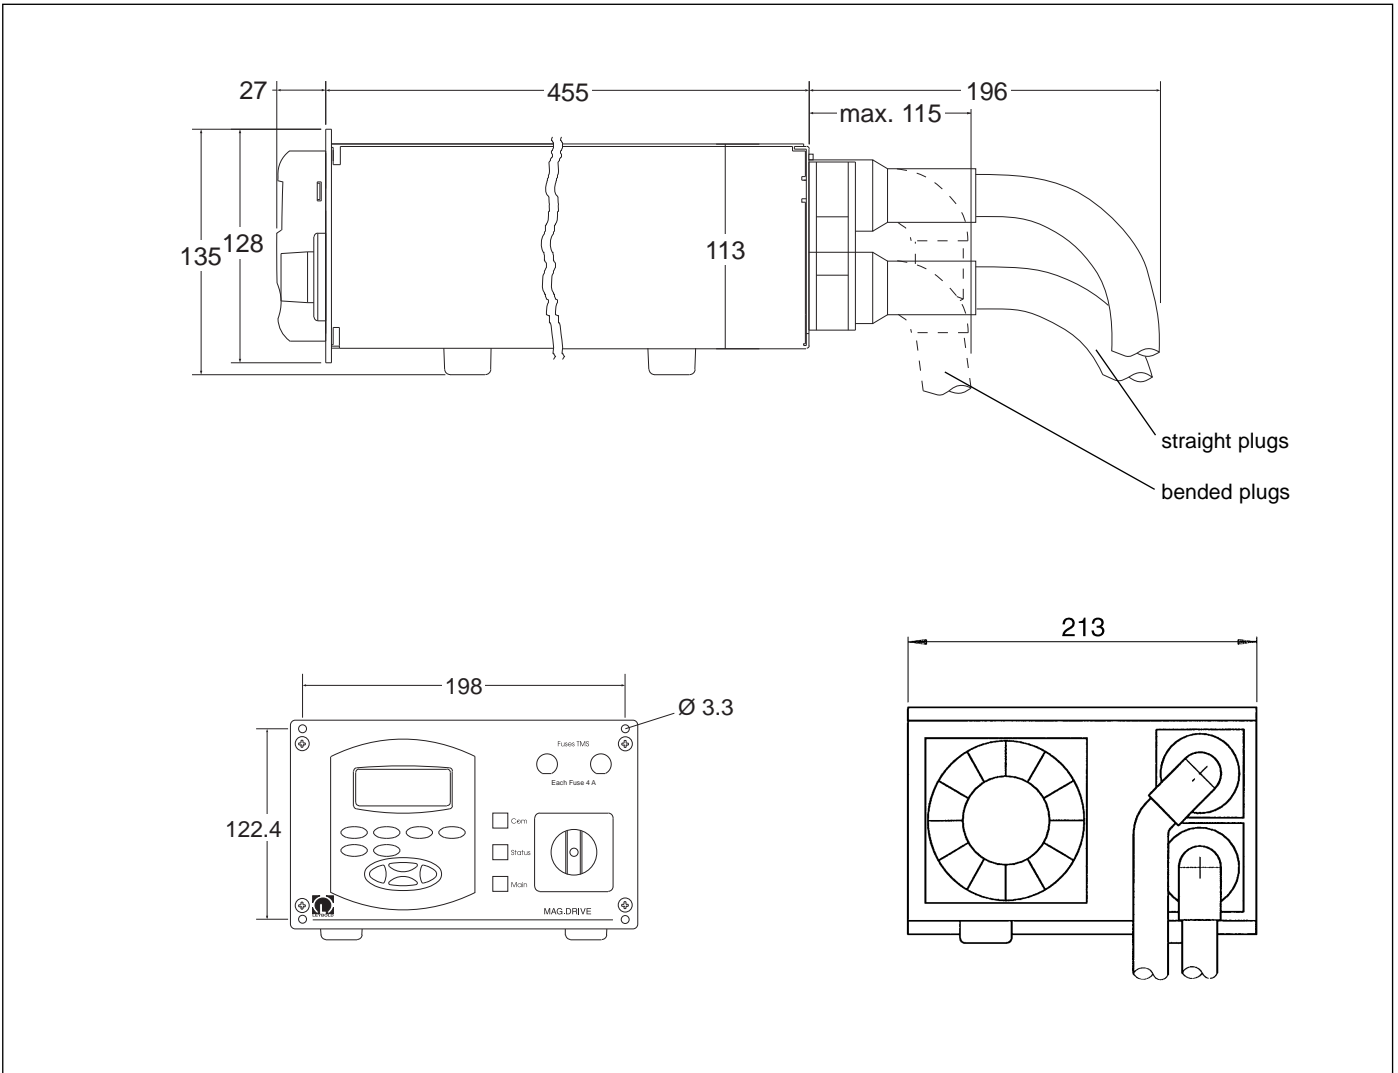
Dimensional drawing of the MAG.DRIVE<sup>digital</sup>, dimensions in mm
